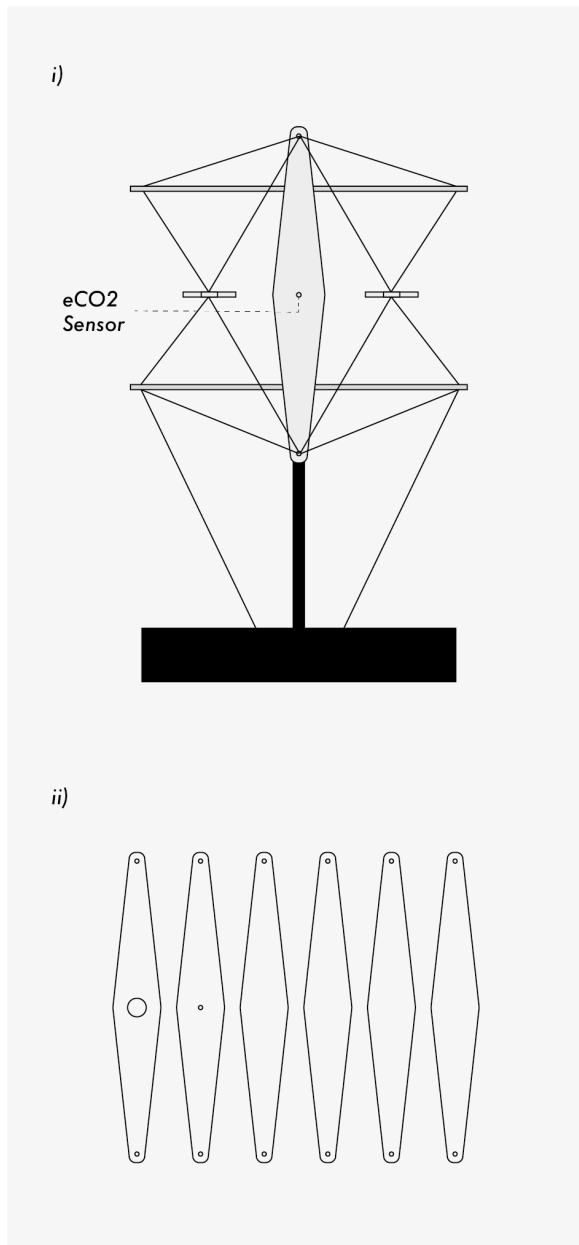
The figure illustrates i) the technical drawing of the kinetic mirror and ii) the six-struts for laser cutting.
